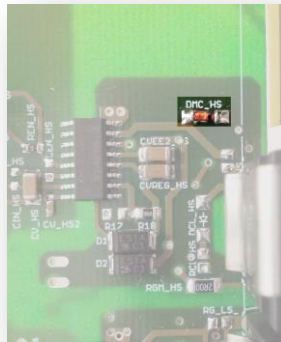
Board assembly - gate circuit with Miller Clamp (top side)
